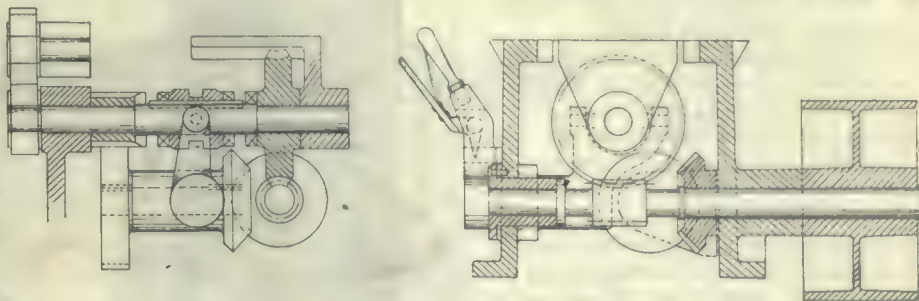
TWO-SPEED GEAR DRIVE ON THREAD MILLERS.
